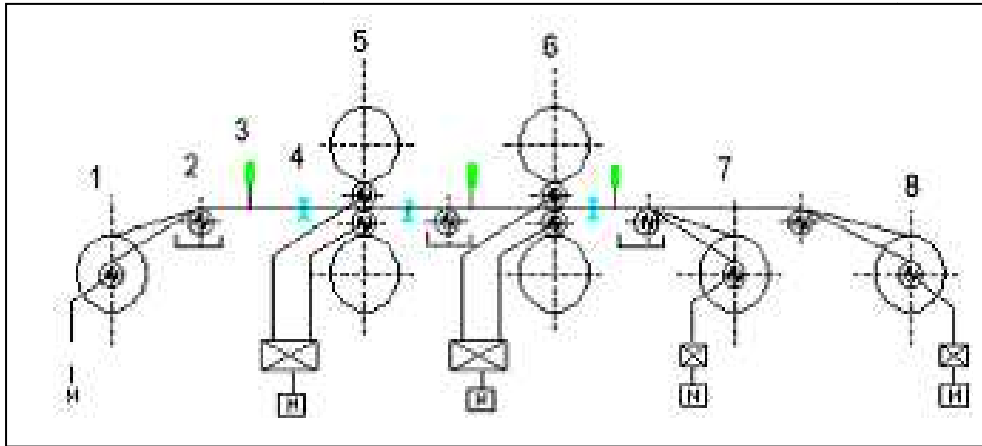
A 2-stand tandem cold strip mill. (1) Coiling #2, (2) tension meter, (3) Laser velometer, (4) thickness gauge, (5) stand #2, (6) stand #1, (7) coiling Machine #1 and (8) uncoiling machine
